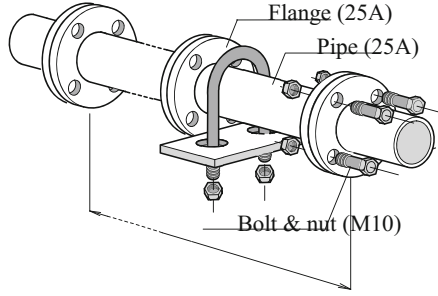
Sketch of experiment apparatus, flanges and bolts.
